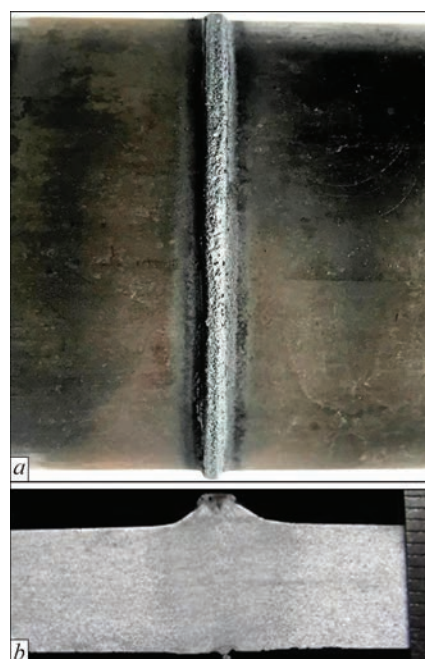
Formation of a welded joint with a controlled upset, where: *a* — welded joint; *b* — cross-section of the welded joint
